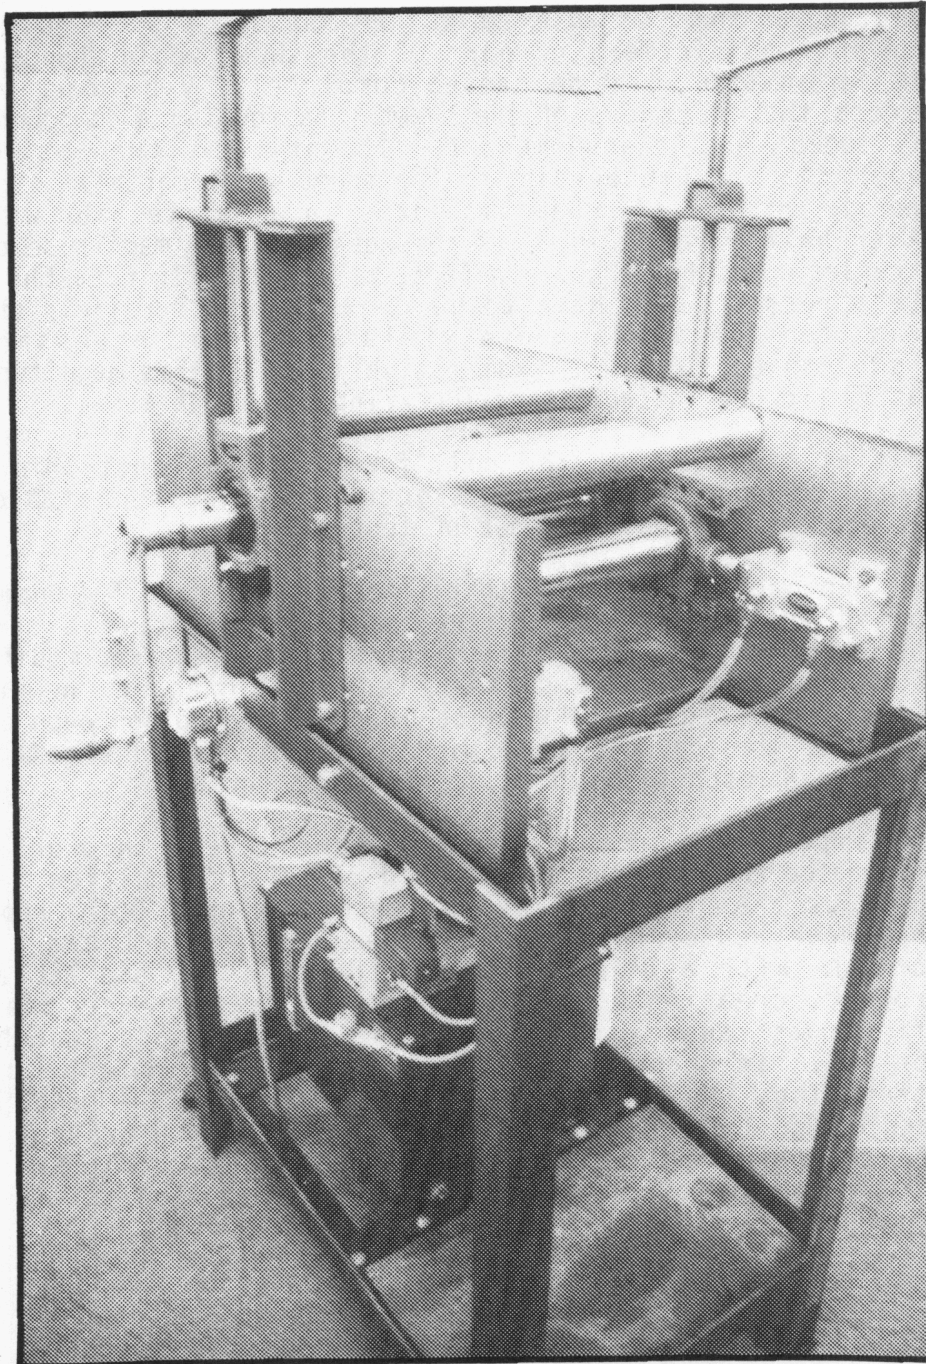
THREE-DIMENSIONAL ROLL FORMER
